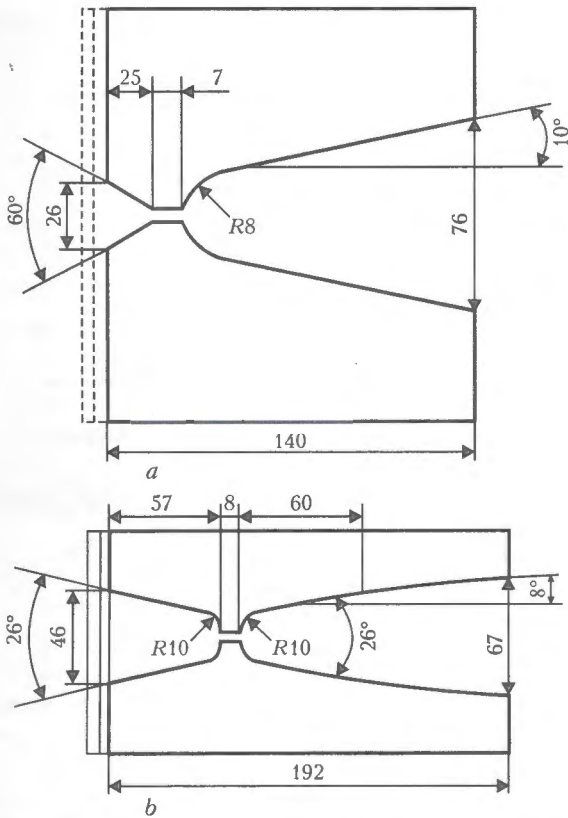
Groove geometry of weld No.4 for WWER-440 (a) and WWER-1000 (b)
